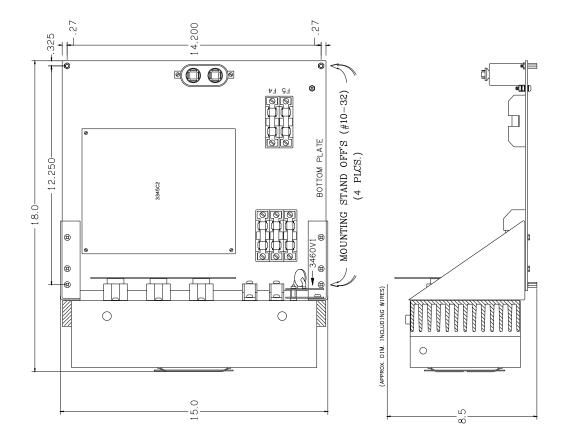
M3345 "X" Chassis with Fan Dimensional Outline
